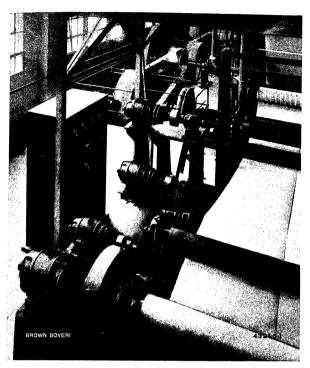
Sectional drive of a cellulose dewatering machine.
